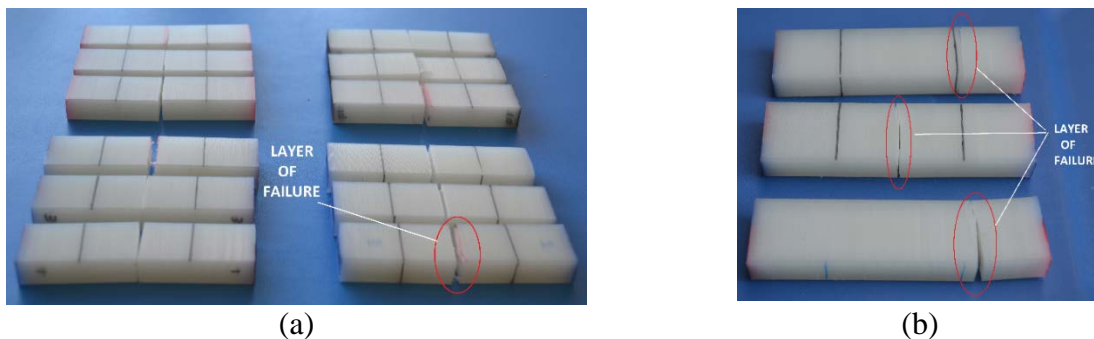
Examples of specimen failure after testing with (a) process interruption specimens grouped based on time interval for pause, all failed at the layer which was paused, and (b) specimens with no process interruption, failed at varying layers.
